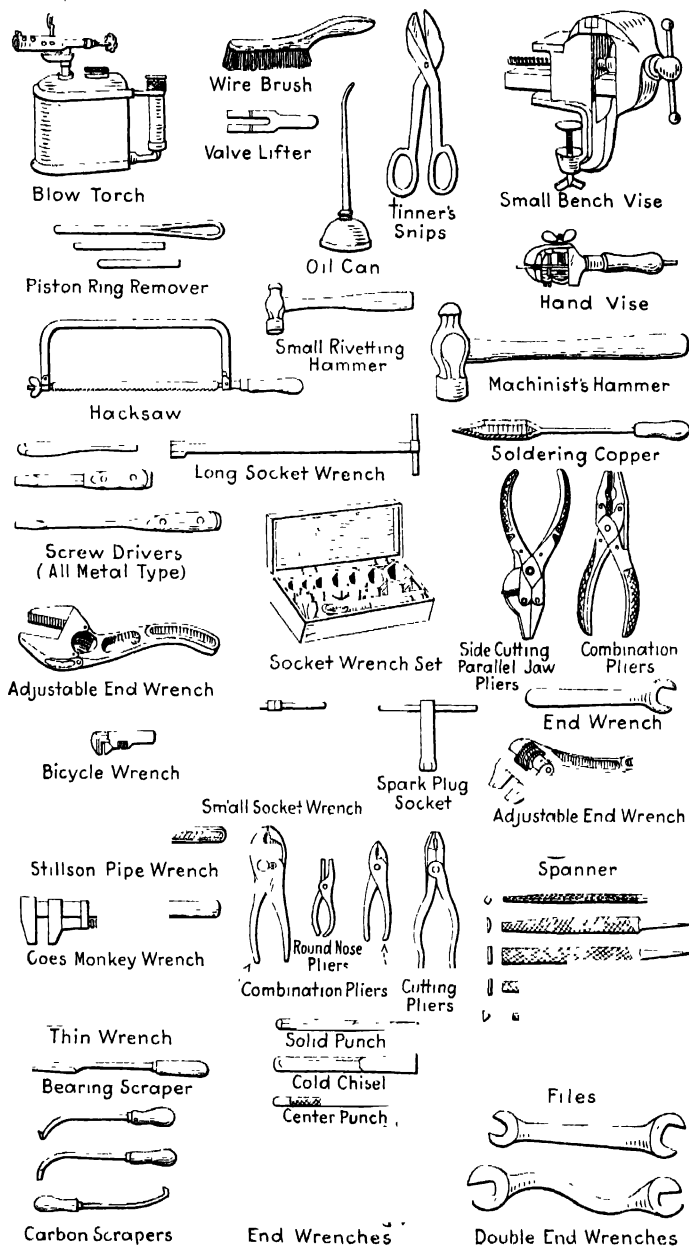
Practical Hand Tools Useful in Dismantling, Repairing and Re-assembling Airplane Engine Parts.
